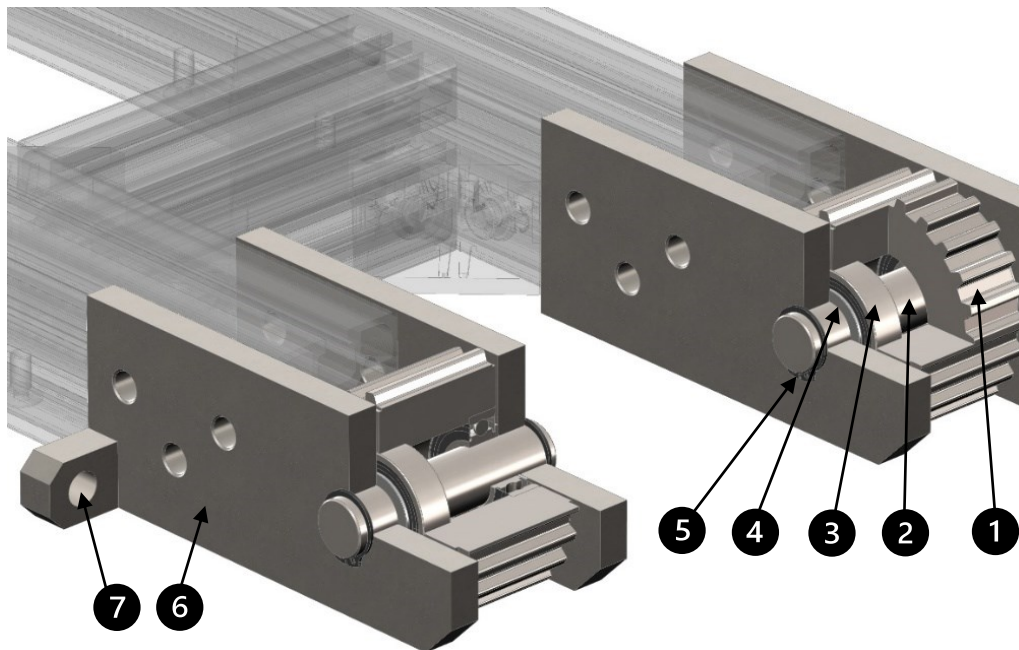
Belt tensioning unit. (1) Timing belt pulley. (2) Axle. (3) Bearing. (4) Shim ring. (5) Circlip. (6) Mounting bracket. (7) Tensioning ear.
